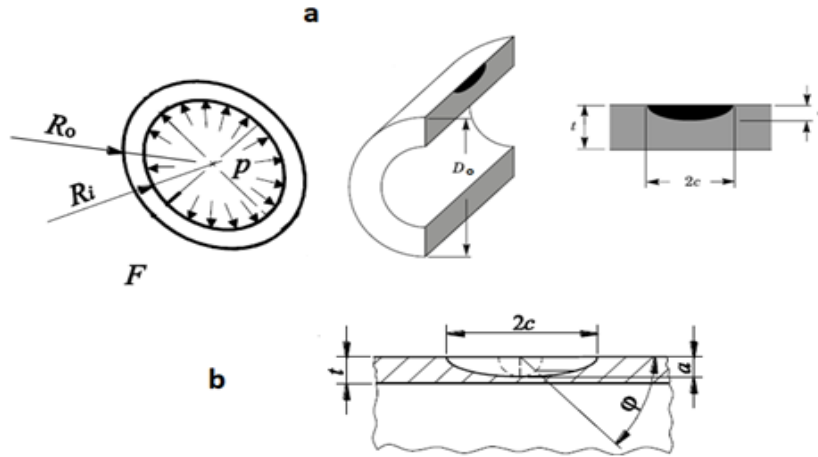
a) Schematic illustration of the pipe specimen with external surface crack, b) crack geometry. p - internal pressure, R_i - inner radius, R_o - outer radius, t - wall thickness, a - crack depth, c - crack half-length
